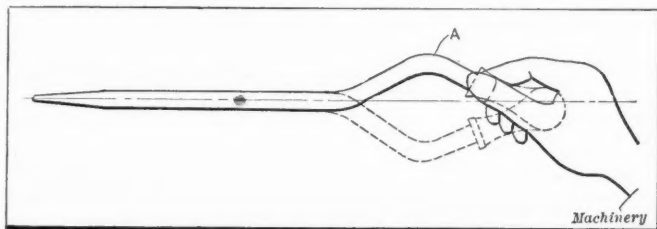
Illustration showing the Method of Operating the Screw Driver
